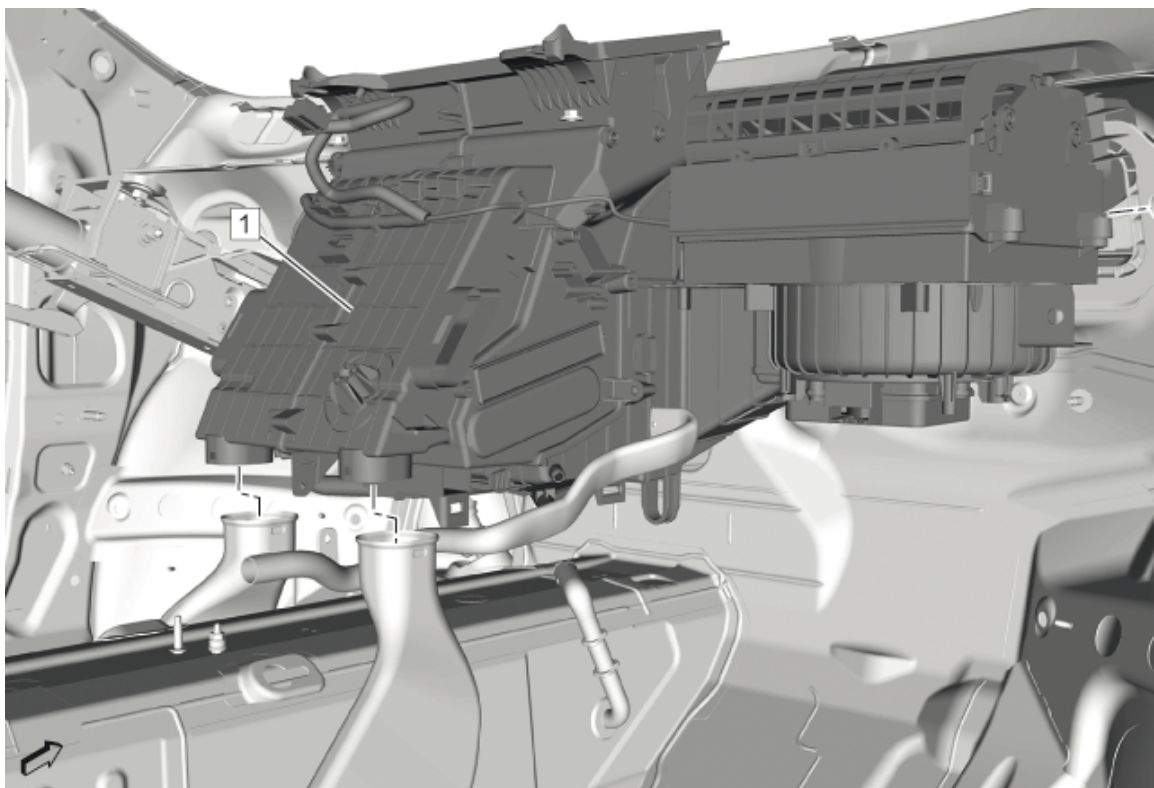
Heater And Air Conditioning Evaporator And Blower Module
